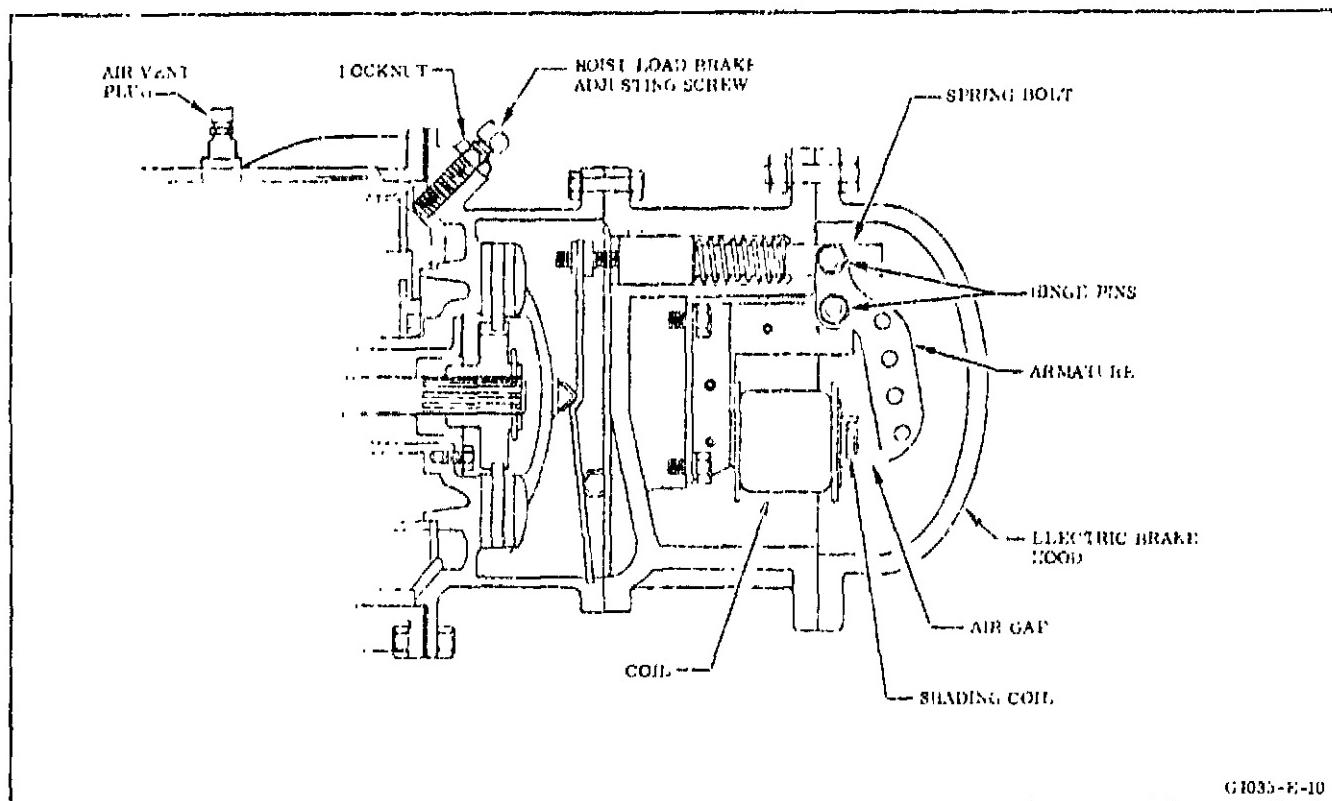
Engine Vertical Installer Hoist Brake Adjustment
